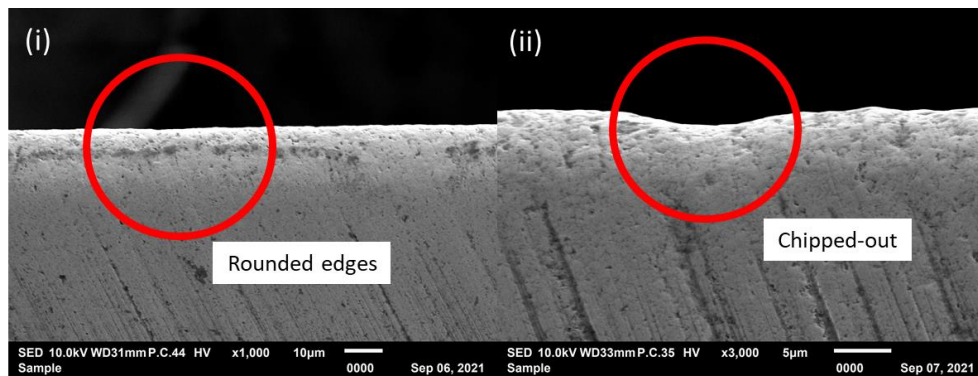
SEM image of (i) rounded edges of the cutting tool and (ii) the chipped-out of the cutting edges after milling with cutting speed 170 m/min in coolant condition for 6000 mm machining length.
